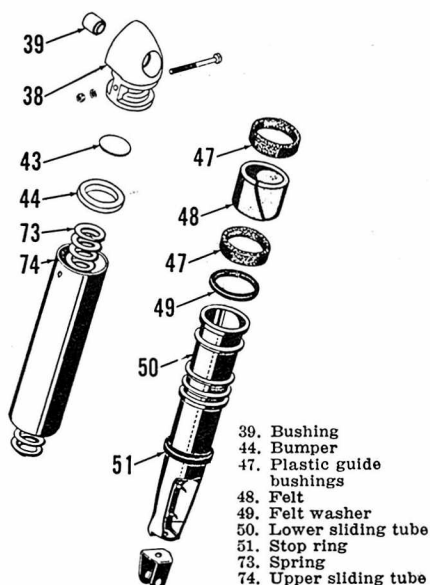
Exploded view of suspension unit typical of type used on rear of Mo-Ped and Campus 50 and both front and rear of 60cc Motor Scooter.
